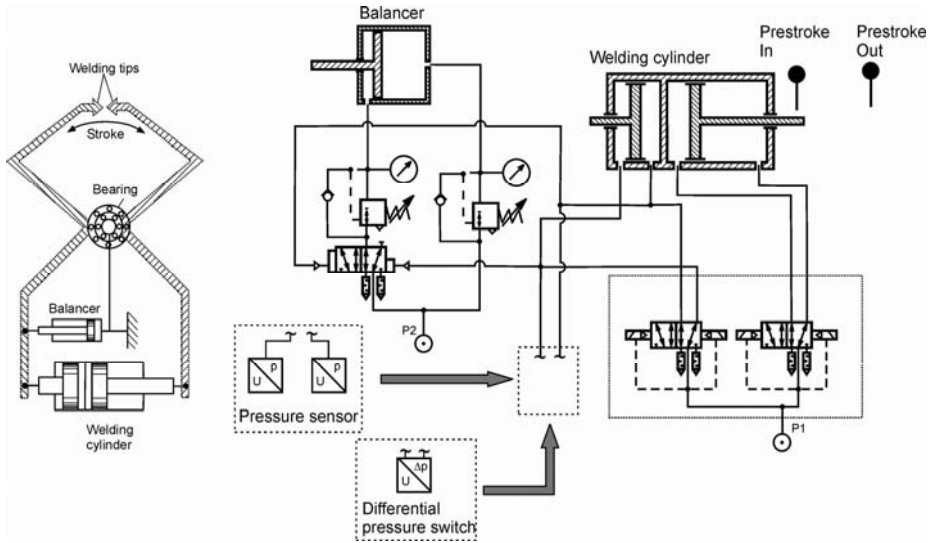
Scheme of a pneumatic driven welding gun and circuit diagram of the pneumatic components
